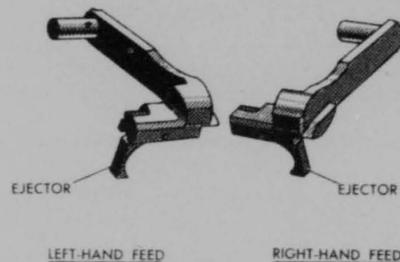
Extractor Assembly with Ejector Assembled for Left-Hand and Right-Hand Feed—Front View.
